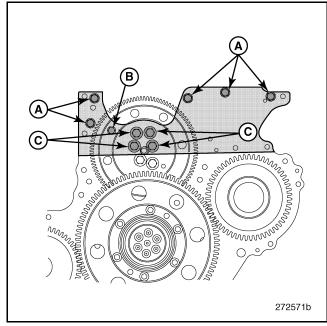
Cylinder Head-to-Timing Gear Plate Screw Locations
